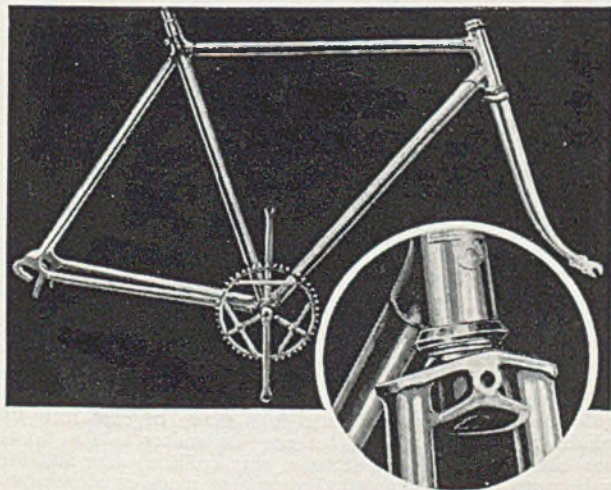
(left).—The Fonteyn brazed duralumin frame. Shown in the inset is a close-up view of the fork crown.
